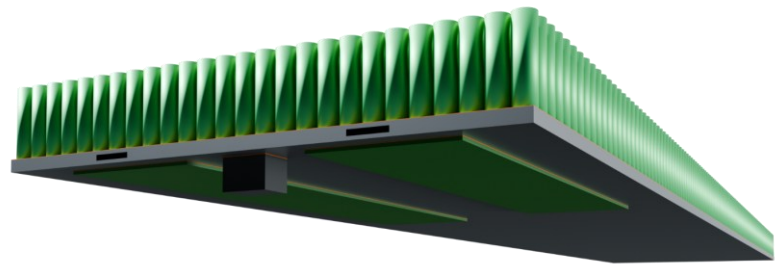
Three-dimensional view of one of the four plate coolers and cell stack forming the integrated battery pack and BIC power converter, whose components are mounted on the bottom of the plate cooler.
